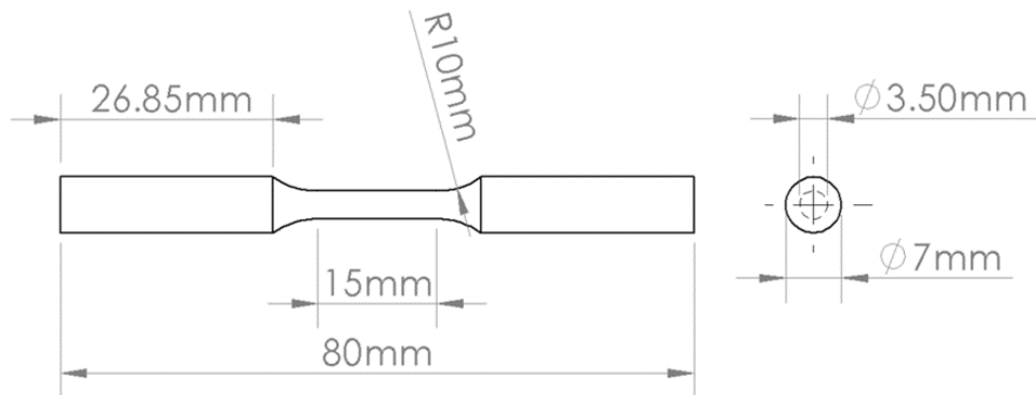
Specimen geometry of LB-DED Inconel 718 alloy used for fatigue testing.
